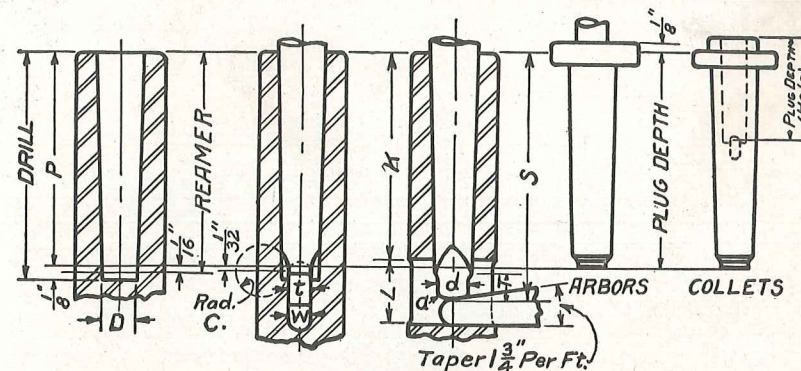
Morse Standard Taper Plug and Socket Gauge
